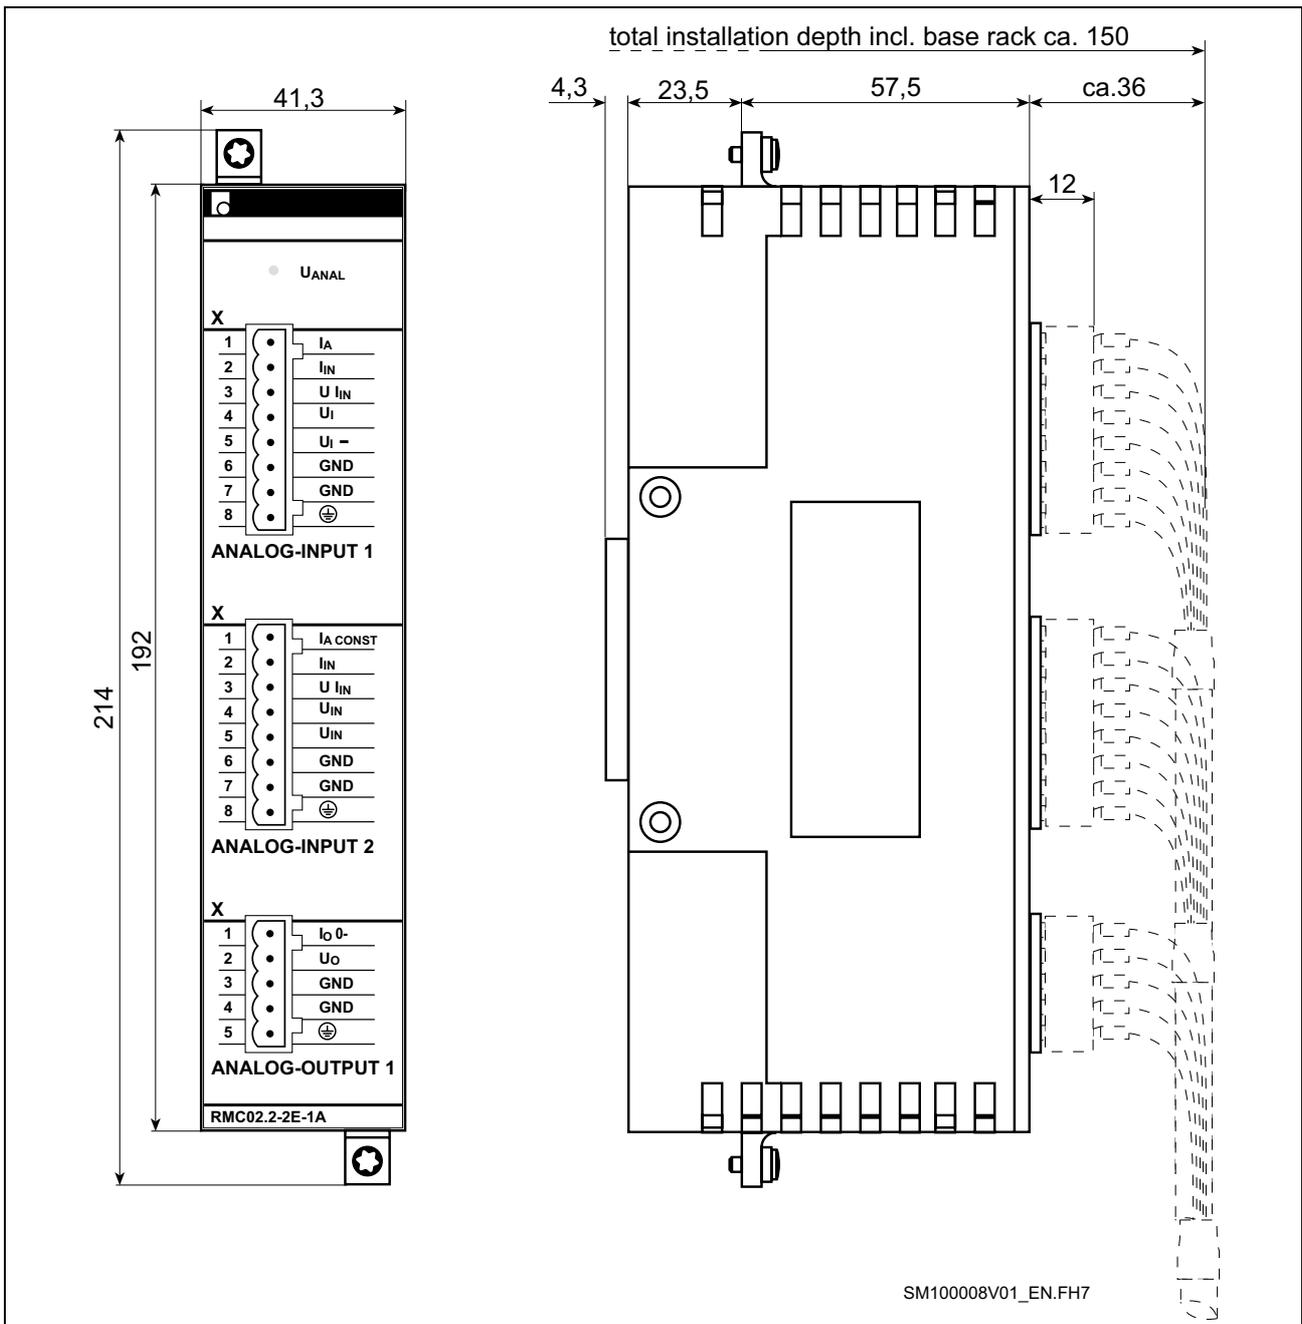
Dimensional sheet RMC02.2-2E-1A
